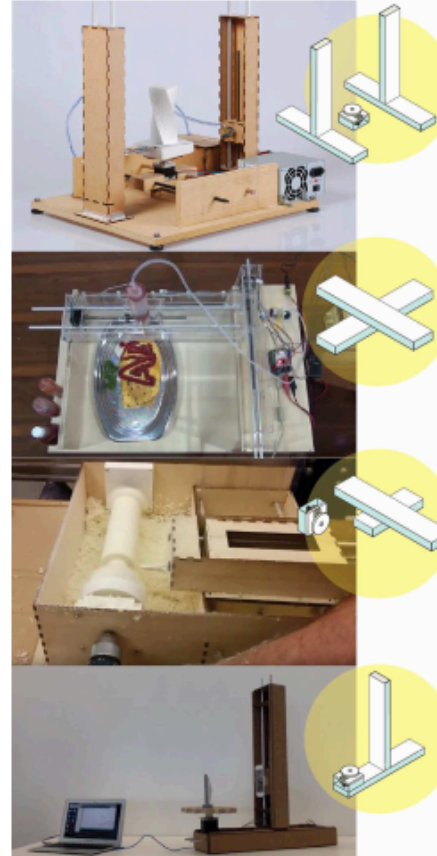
Machines built in the wild using the Cardboard Machine Kit: A 4-axis hot wire cutter by Fablab Monterey, an omelette ketchup machine by Fablab Kitakyuuga, a lathe by OpenDot, and a 3D scanner by Fablab Pueblo. Schematics of motion modules shown on the right.
